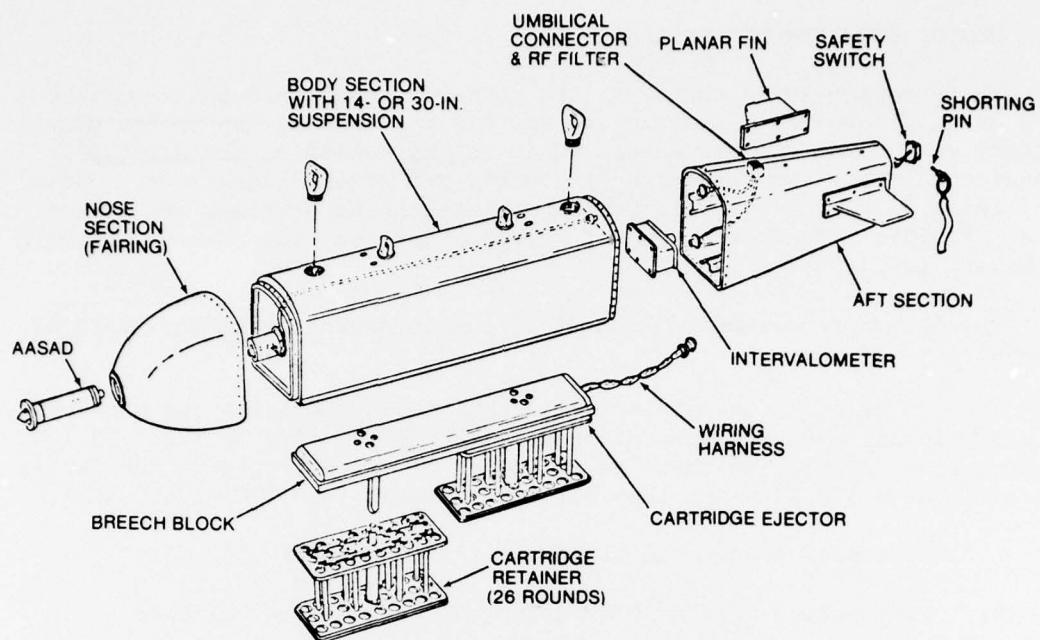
Exploded view of SUU-53/A cartridge dispenser.
